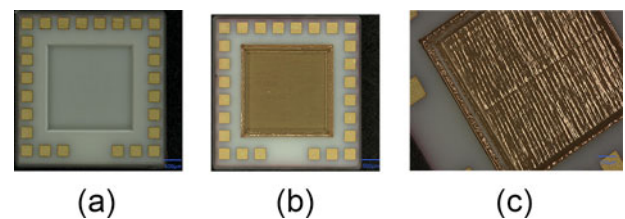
Manufactured prototype of horn-shaped reflector of eSRR antenna: (a) prior to metallization; (b) after metallization with AJ-printing; and (c) step with missing metallization.
